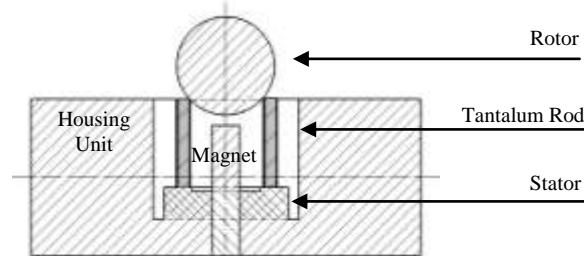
Cross section side view of the proposed 3D USM for machine vision and robot guidance industrial applications
